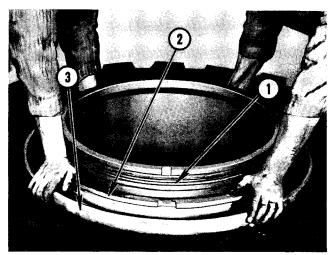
REPLACING BEAD SEAT BAND 1. "O" Ring Groove 3. Flange
